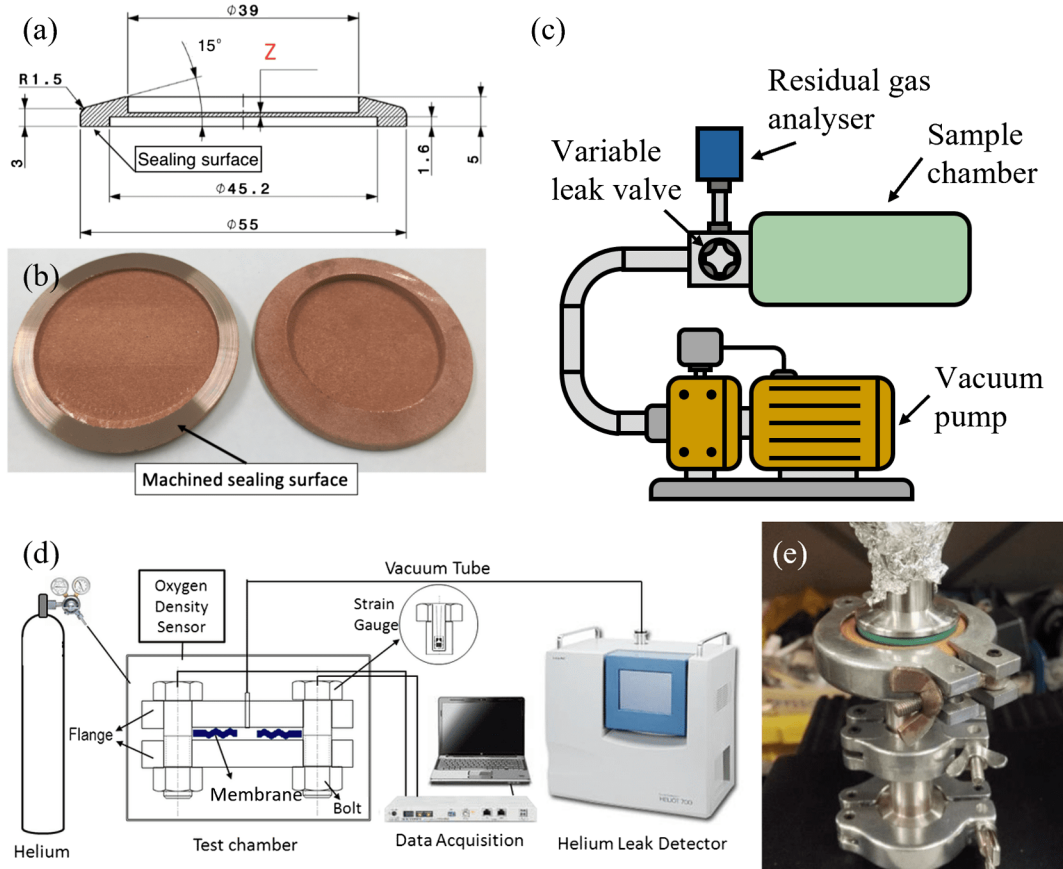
(a) Design and (b) photograph of additively manufactured vacuum membranes [151], schematics of experimental setups for (c) outgassing and (d) helium leak testing [152], and (e) photograph of the clamped membrane during helium leak test [151].
